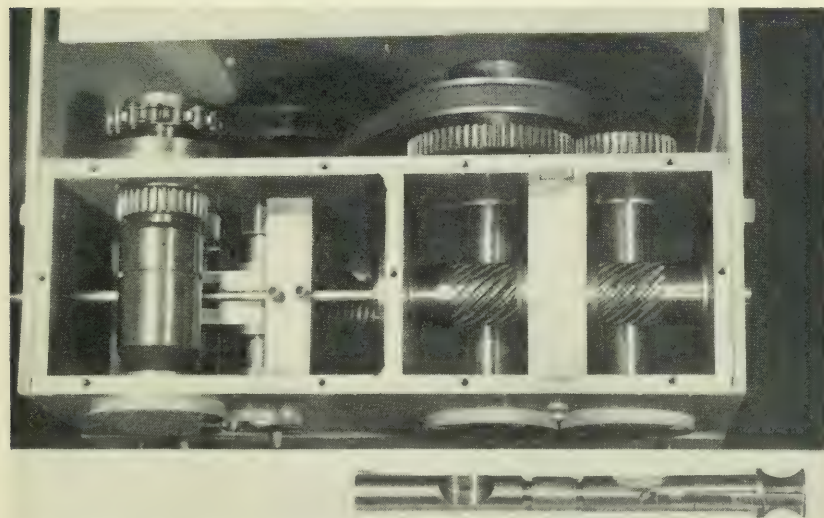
Experimental machine with one double head, prototype of 24 and 30 double head wire straightening machines.
